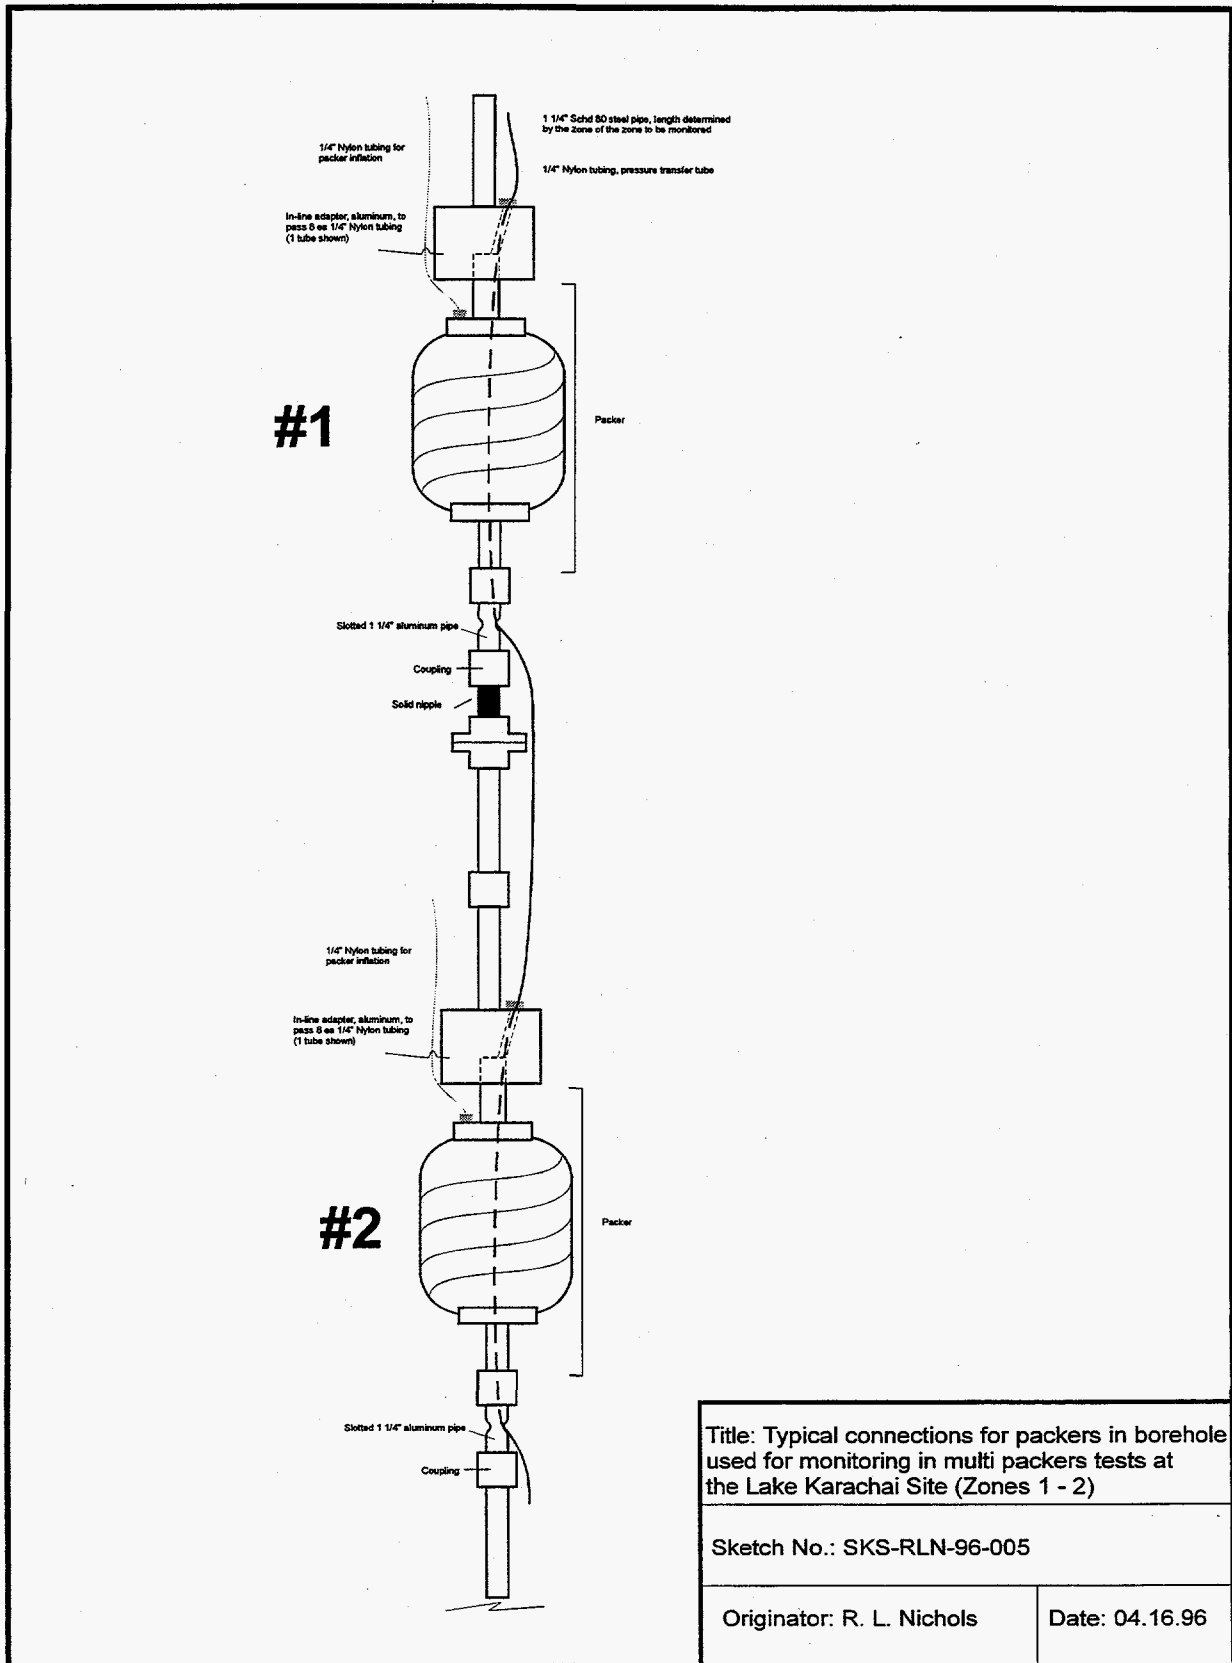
Schematic drawing of multipacker assembly for observation wells 176 and 2/96.
